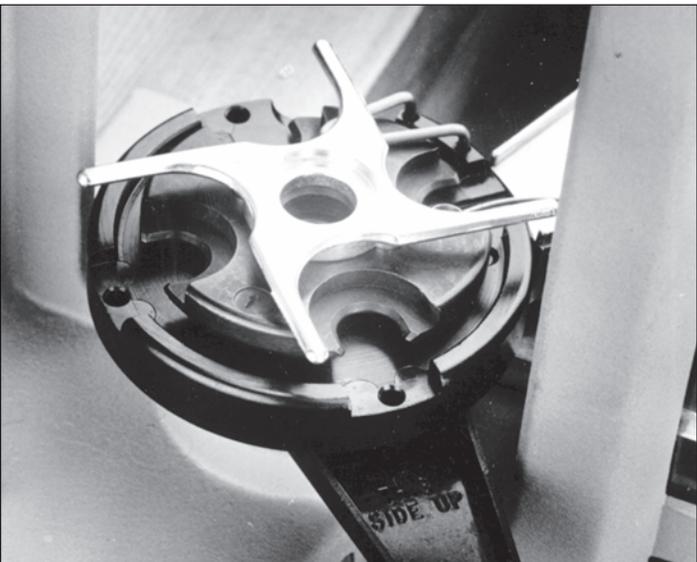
Inserting the shellplate bolt, first through the index sprocket then the shellplate.
